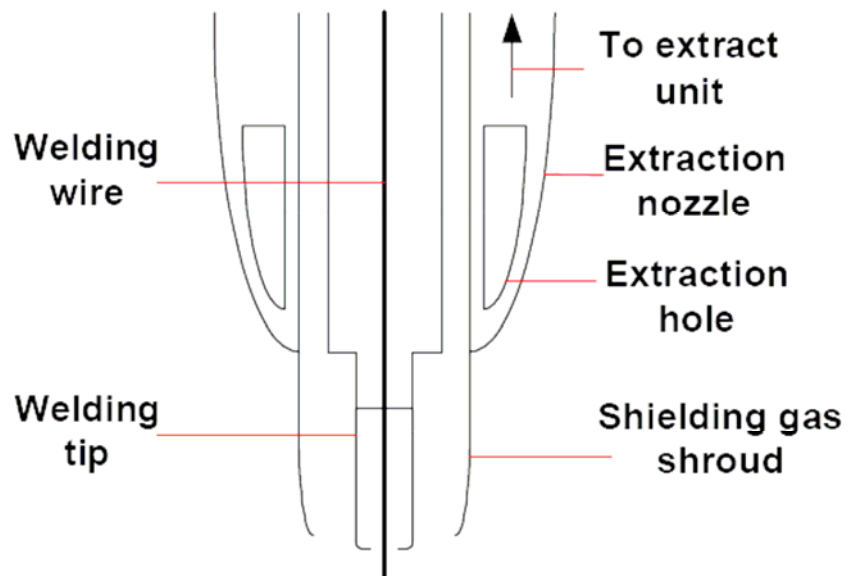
Schematic diagram of Abicor Binzel fume extracting welding torch
